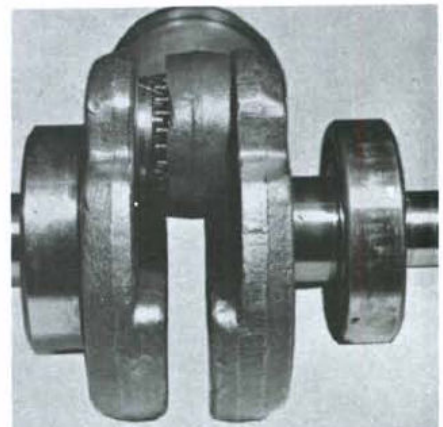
"Piston Guided" connecting rod pushed forward to expose bearing rollers. Lower end of rod is centered on crankshaft by the piston.
